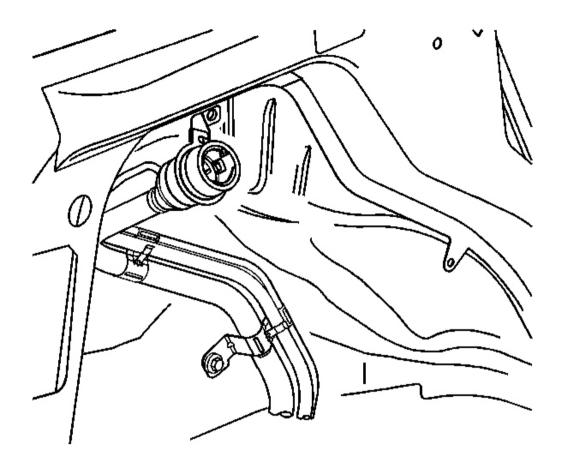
View Of Fuel Pipe Intermediate Bracket Bolt Courtesy of GENERAL MOTORS CORP.
